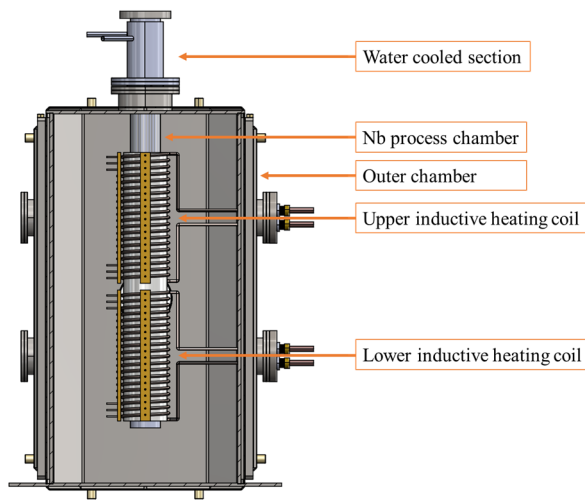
Drawing section of the Nb process chamber inside the containment HV chamber.
